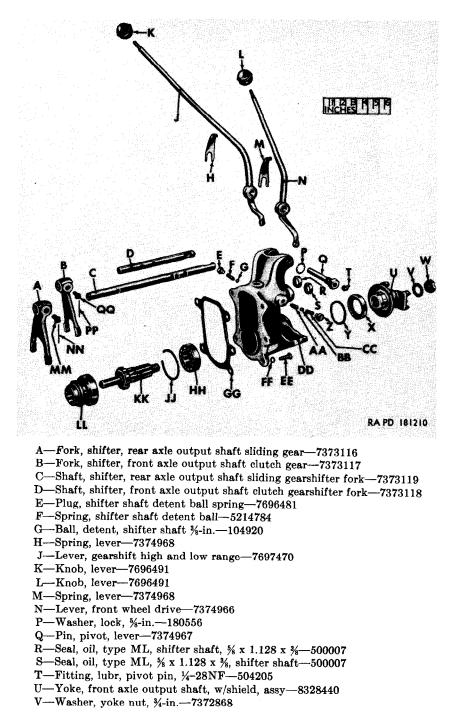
Transfer front axle output shaft bearing retainer and shifter shafts disassembled view.
